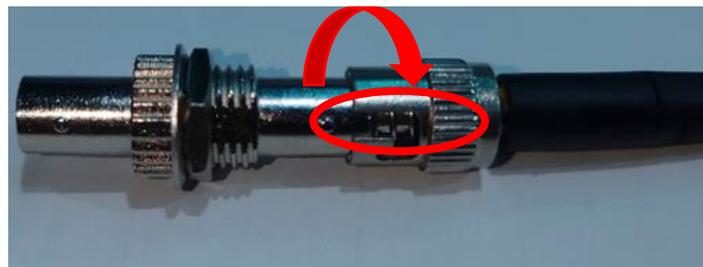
Rotate the cable end locking groove to align with the connector end locking point
